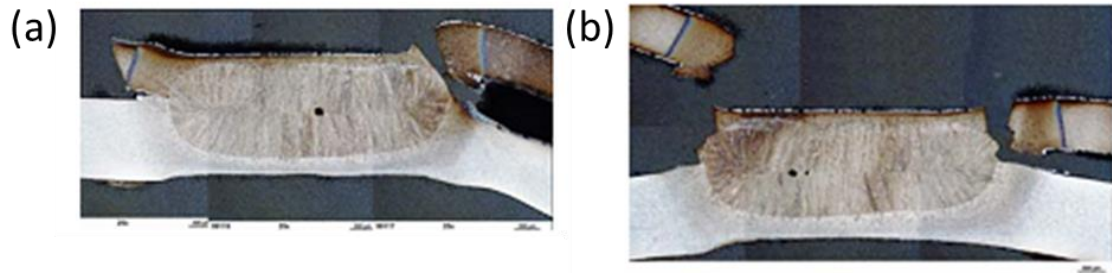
(a) Pull-out failure in SCHAHAZ of 22MnB5 in tensile shear test (TST), and (b) pull-out failure in CGHAHAZ of 22MnB5 in KS2-90° in resistance spot welded 22MnB5/HC340LAD [3]
